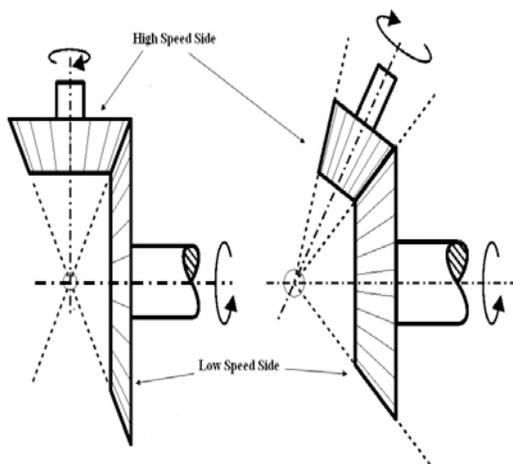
Perpendicular Bevel Gear and Bevel Gear at any angle.
